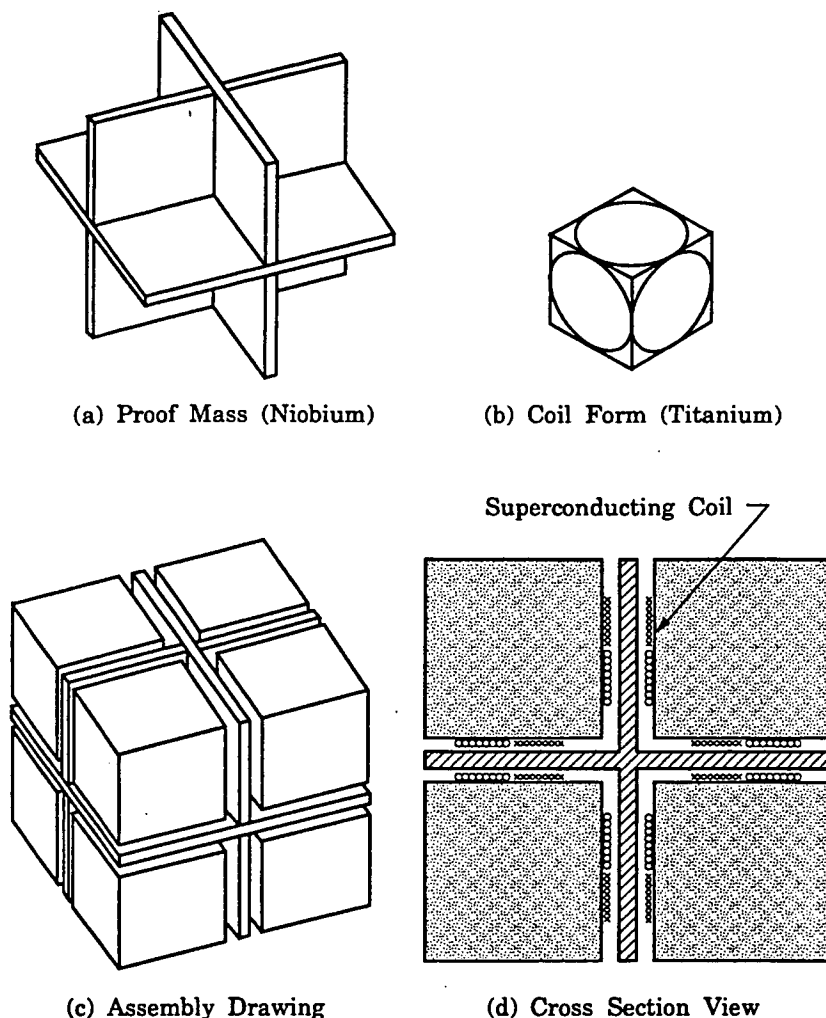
Six-Axis Superconducting Accelerometer (SSA) Assembly
